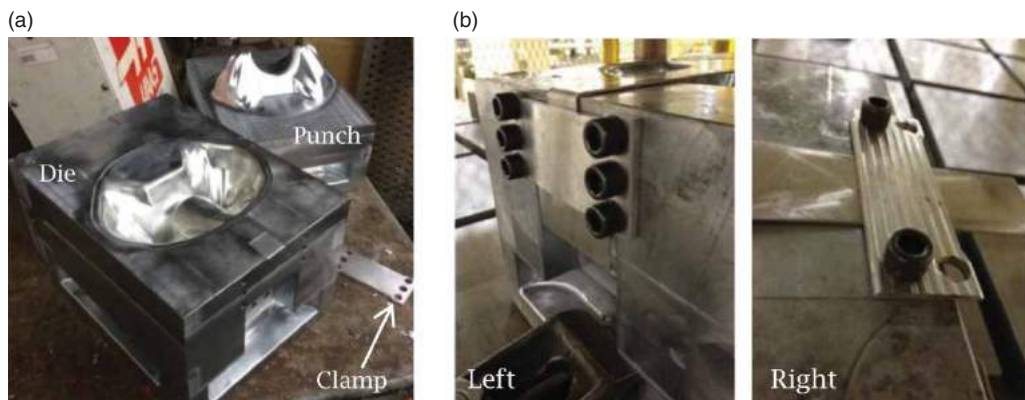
Manufactured tooling blocks (a) punch, die and clamps machined, (b) implementation of the forming scenario with ‘binders’.
